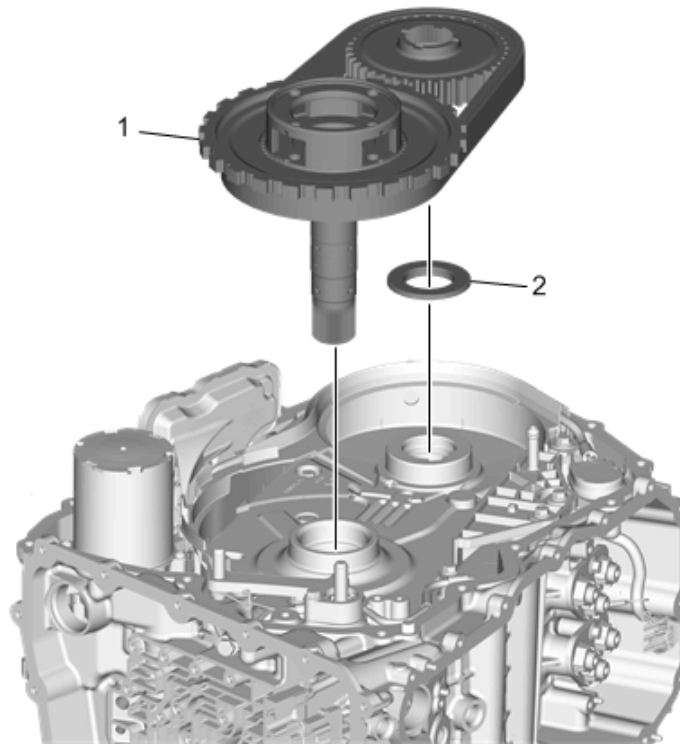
Drive Sprocket, Driven Sprocket And Drive Link
